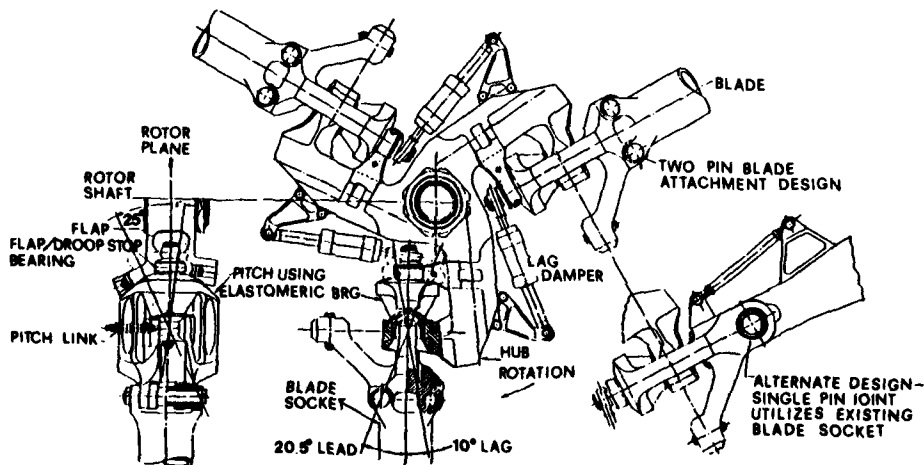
General configuration of elastomeric-bearing rotor hub
